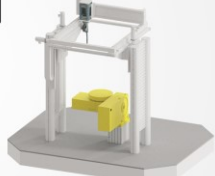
Configuration of spindle and welding torch for the Variaxis J600 AM
